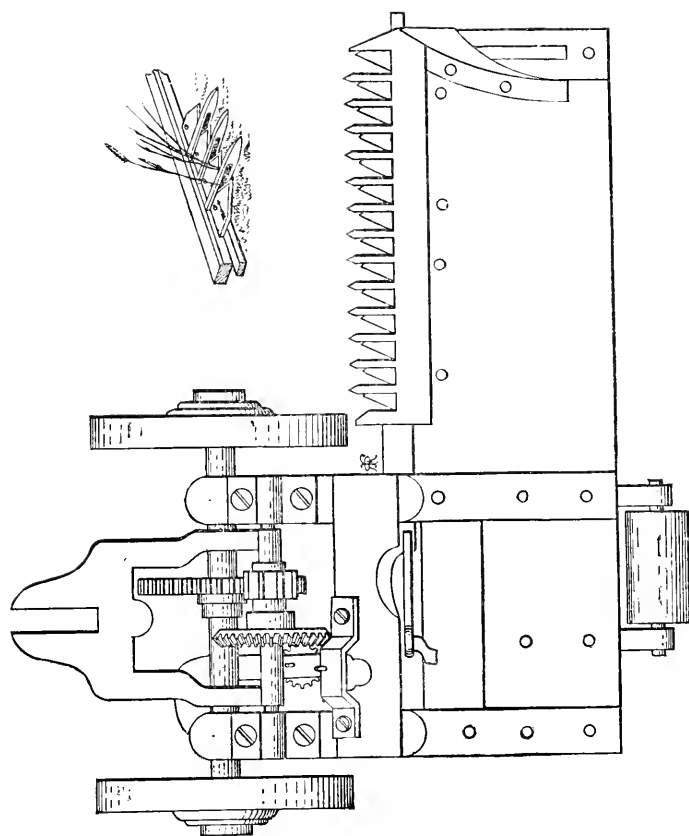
Plan View, and Section of Finger Bar of Hussey Machine.
